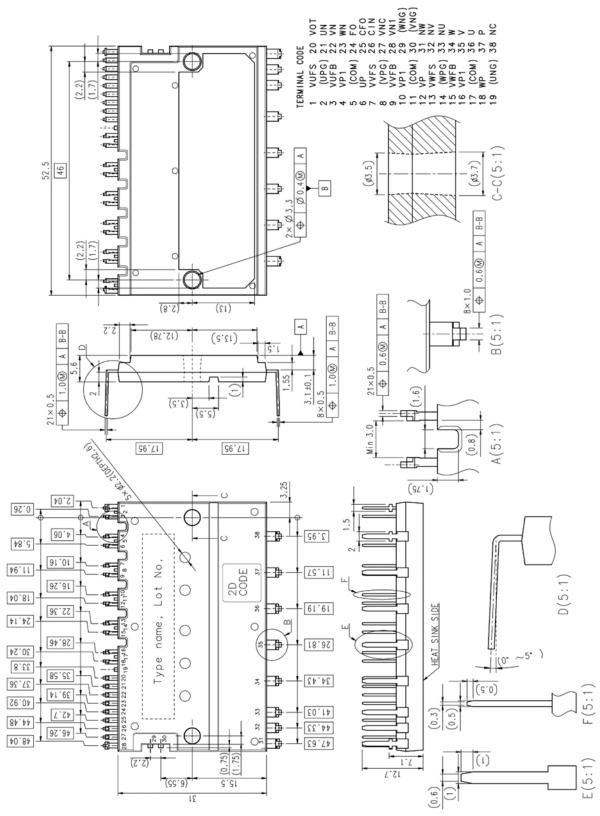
PSSxxS71F6 package outline drawing (Dimension in mm)
